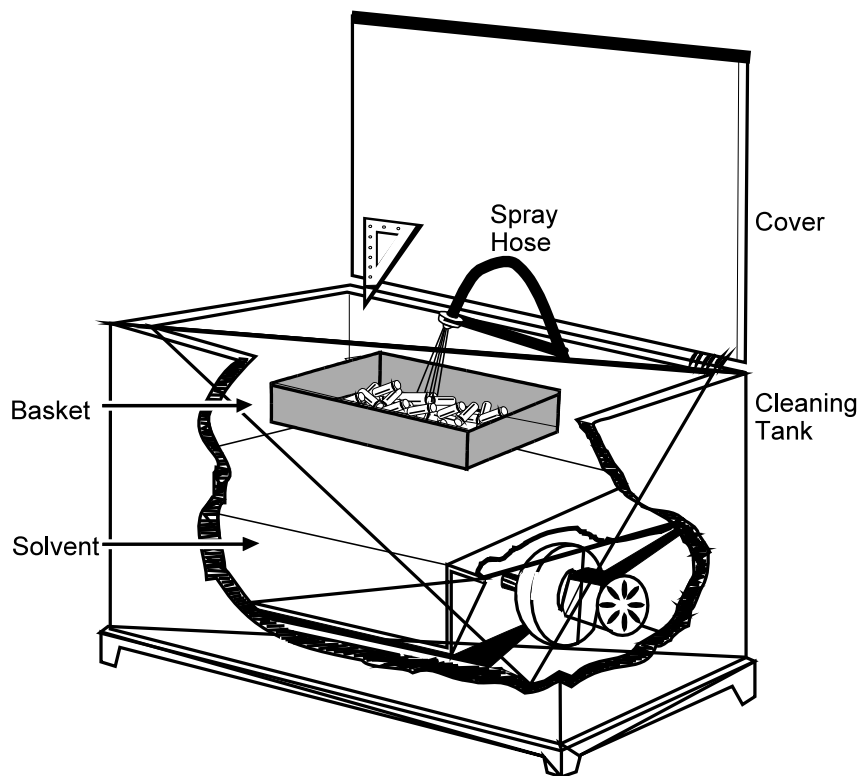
Immersion Cleaning Machine (Batch Cold Cleaning)
